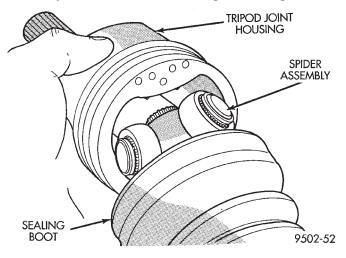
Spider Assembly Removal from Tripod Joint Housing
